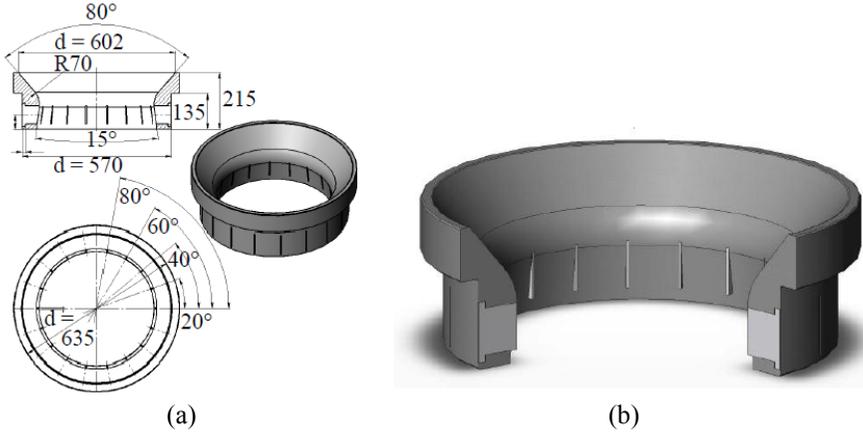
Control valve seats for K-1000-60/1500 turbines shown with machined slots for insertion of wedge-shaped fins (a) and with fins pressed in (b) [5].
